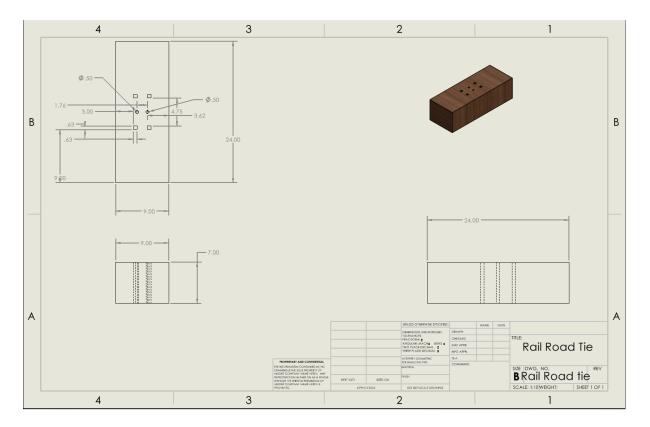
EXAMPLE RAIL TIE SECTION.
